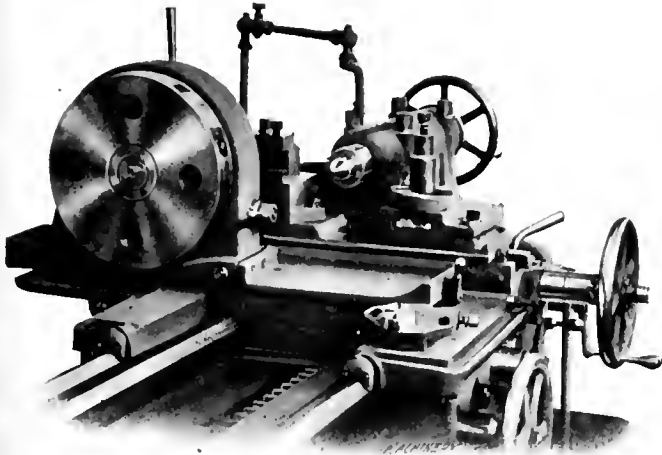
Side View of Carriage of 4 by 48-inch Marvel Lathe, looking toward Tail-stock, showing the Rotating Tool-holder
